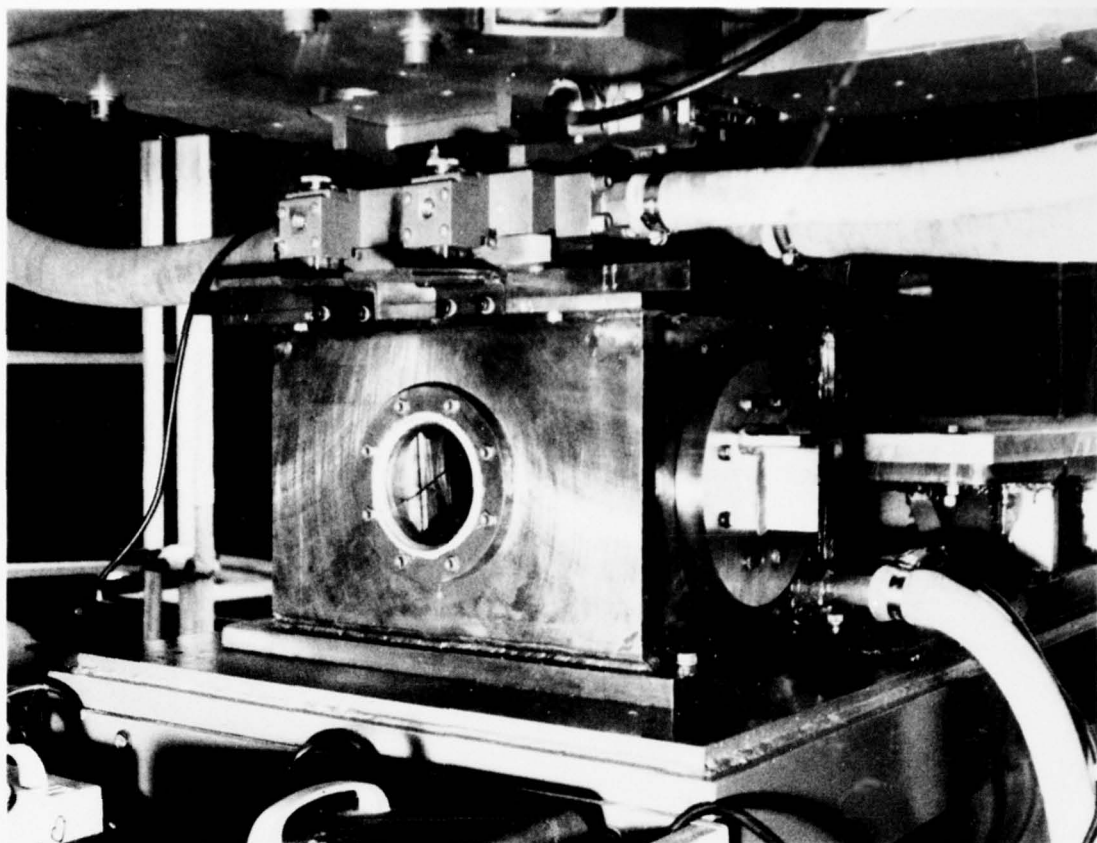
Special Shapes Weld Fixture Setup for Top Weld on Tee Angle
